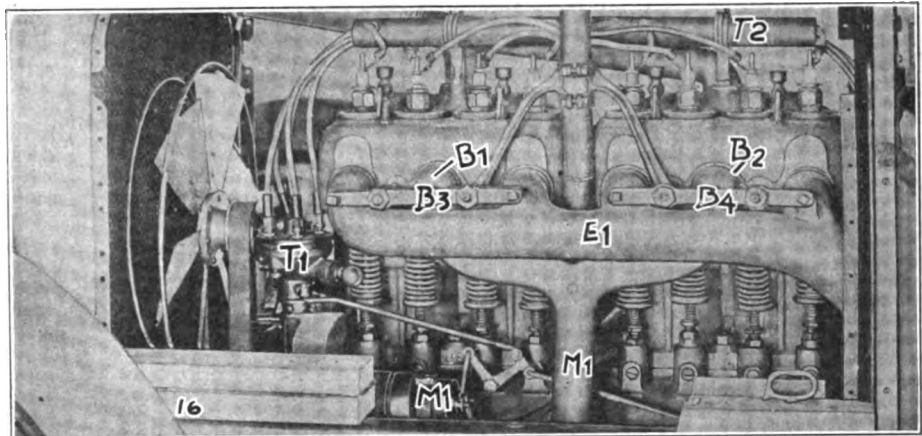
Thirty-five horsepower Moline motor, magneto side, shown in chassis
